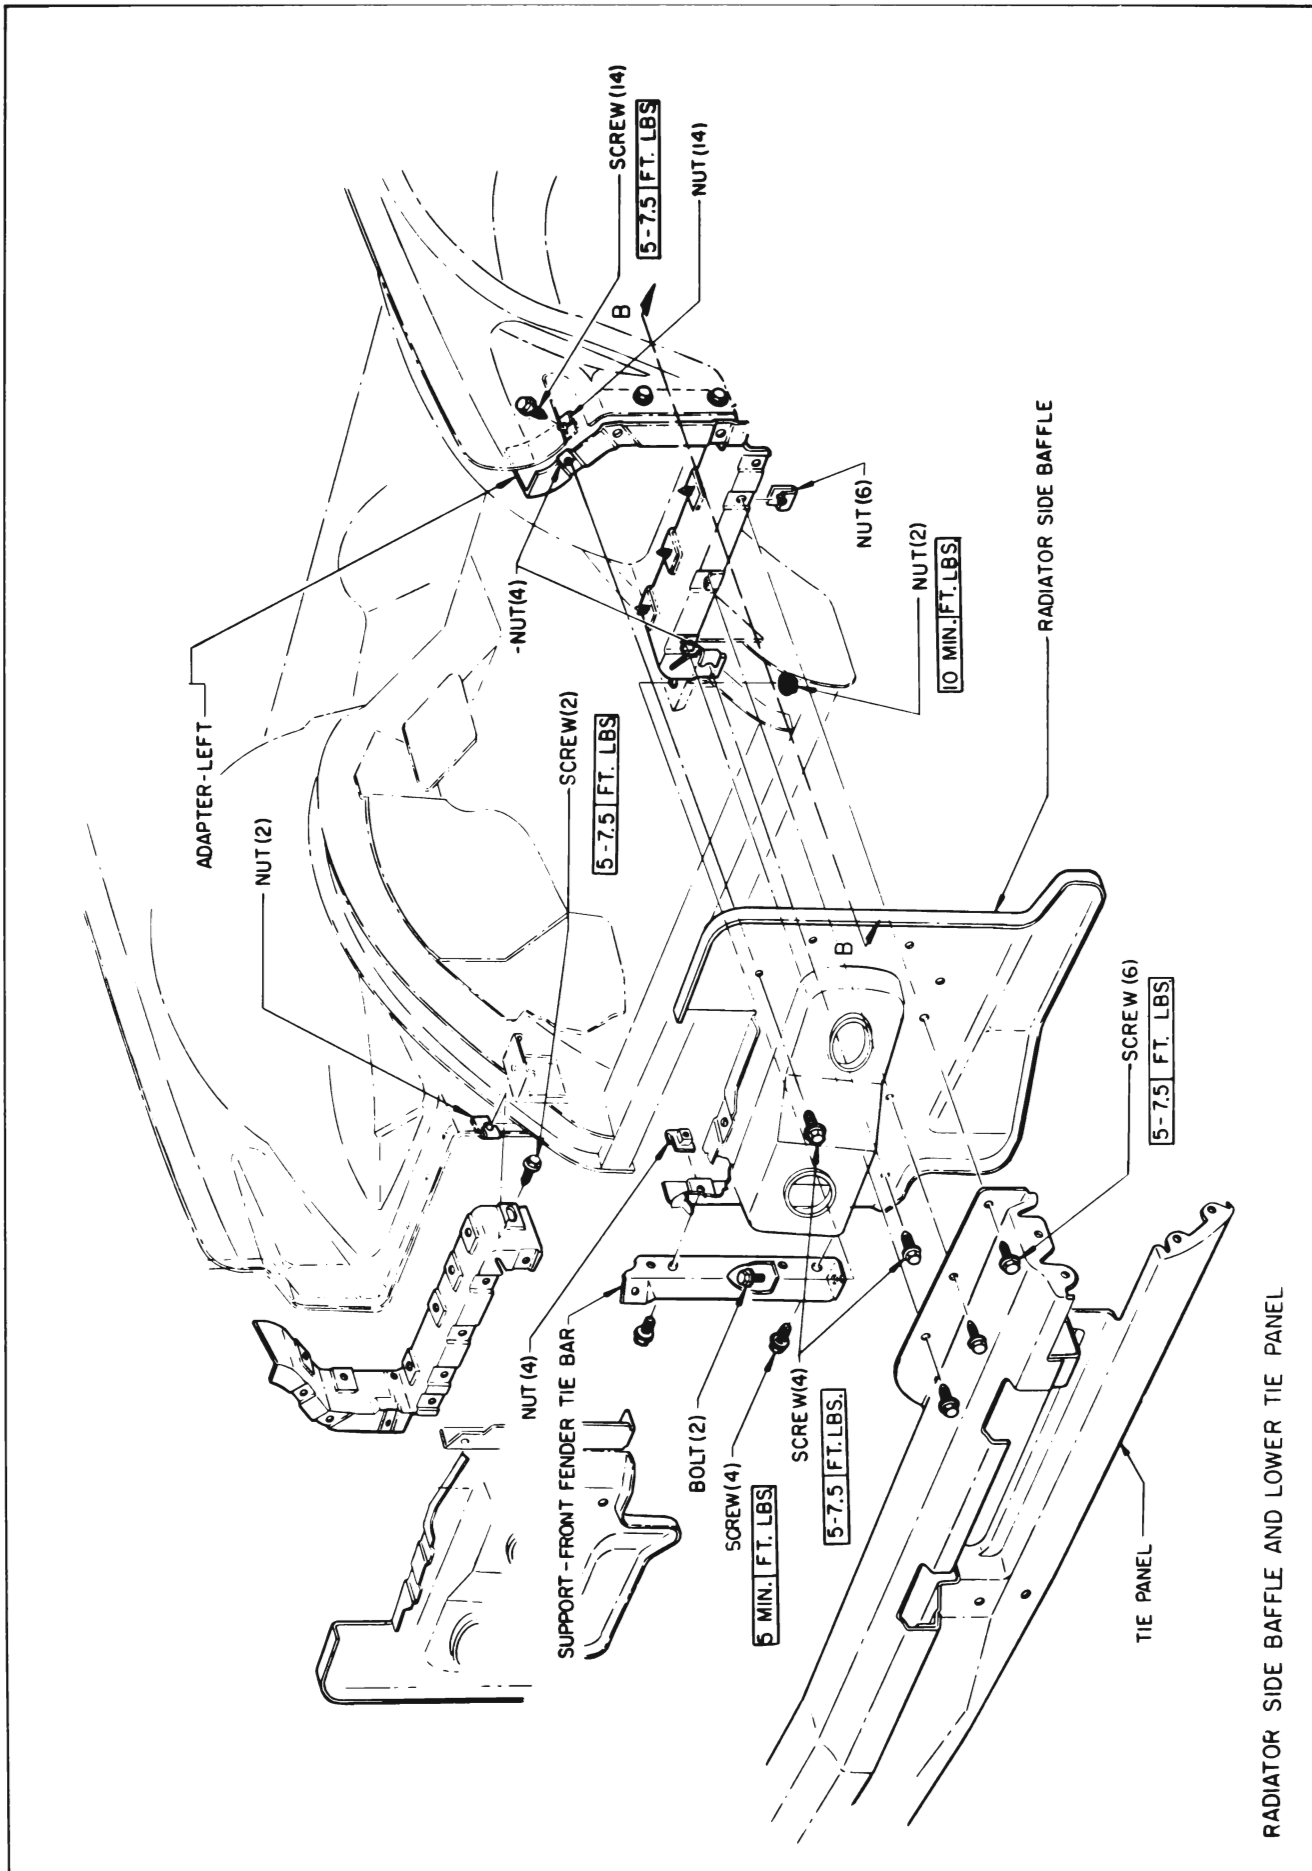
Radiator Side Baffle and Lower Tie Panel Installation
